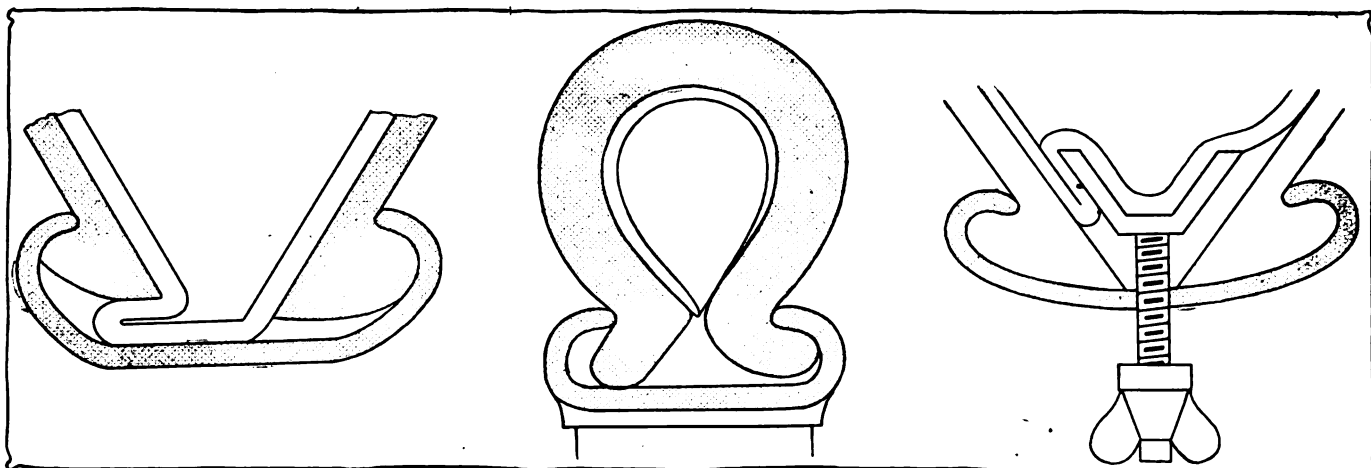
Showing how the inner tube may be pinched between the bead and the casing, the bead and the security bolt or the two beads
